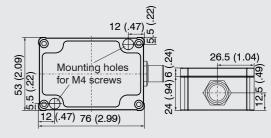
Dimensional drawing, dimensions in mm (inches), not to scale
